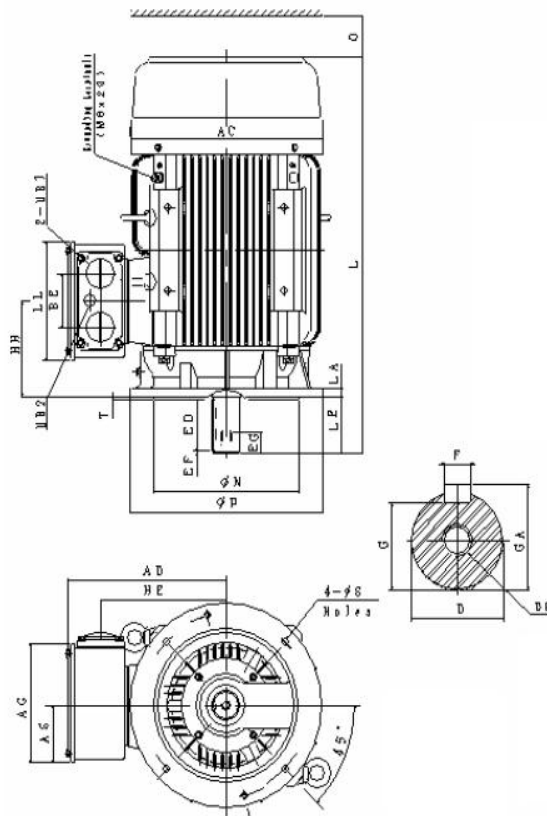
Outline drawing of cast iron design, mounting V1; frame size 200
